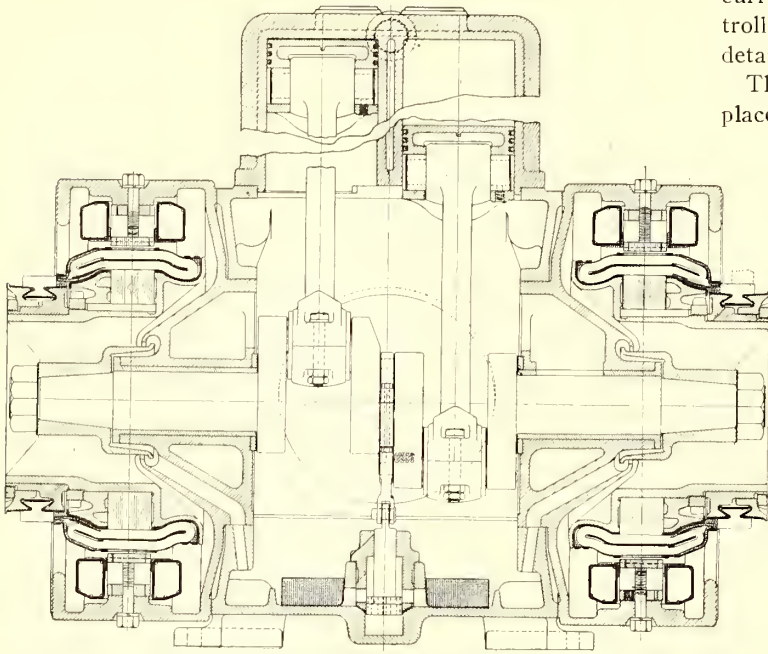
SECTION OF MOTOR AIR COMPRESSOR
